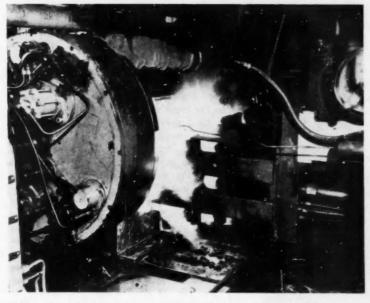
Flame hardening in process on all bearing surfaces of the crankshaft in the same fixture shown in Fig. 1. Burner blocks for crankpins are reciprocated as the shaft is rotated.
